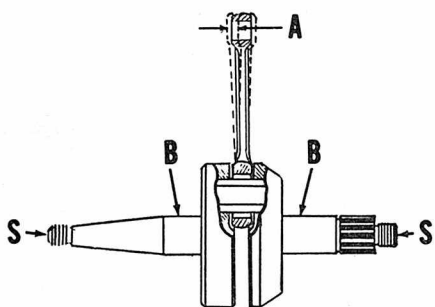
Support crankshaft on lathe centers at points (S) and place dial indicators at (B) to check runout.
